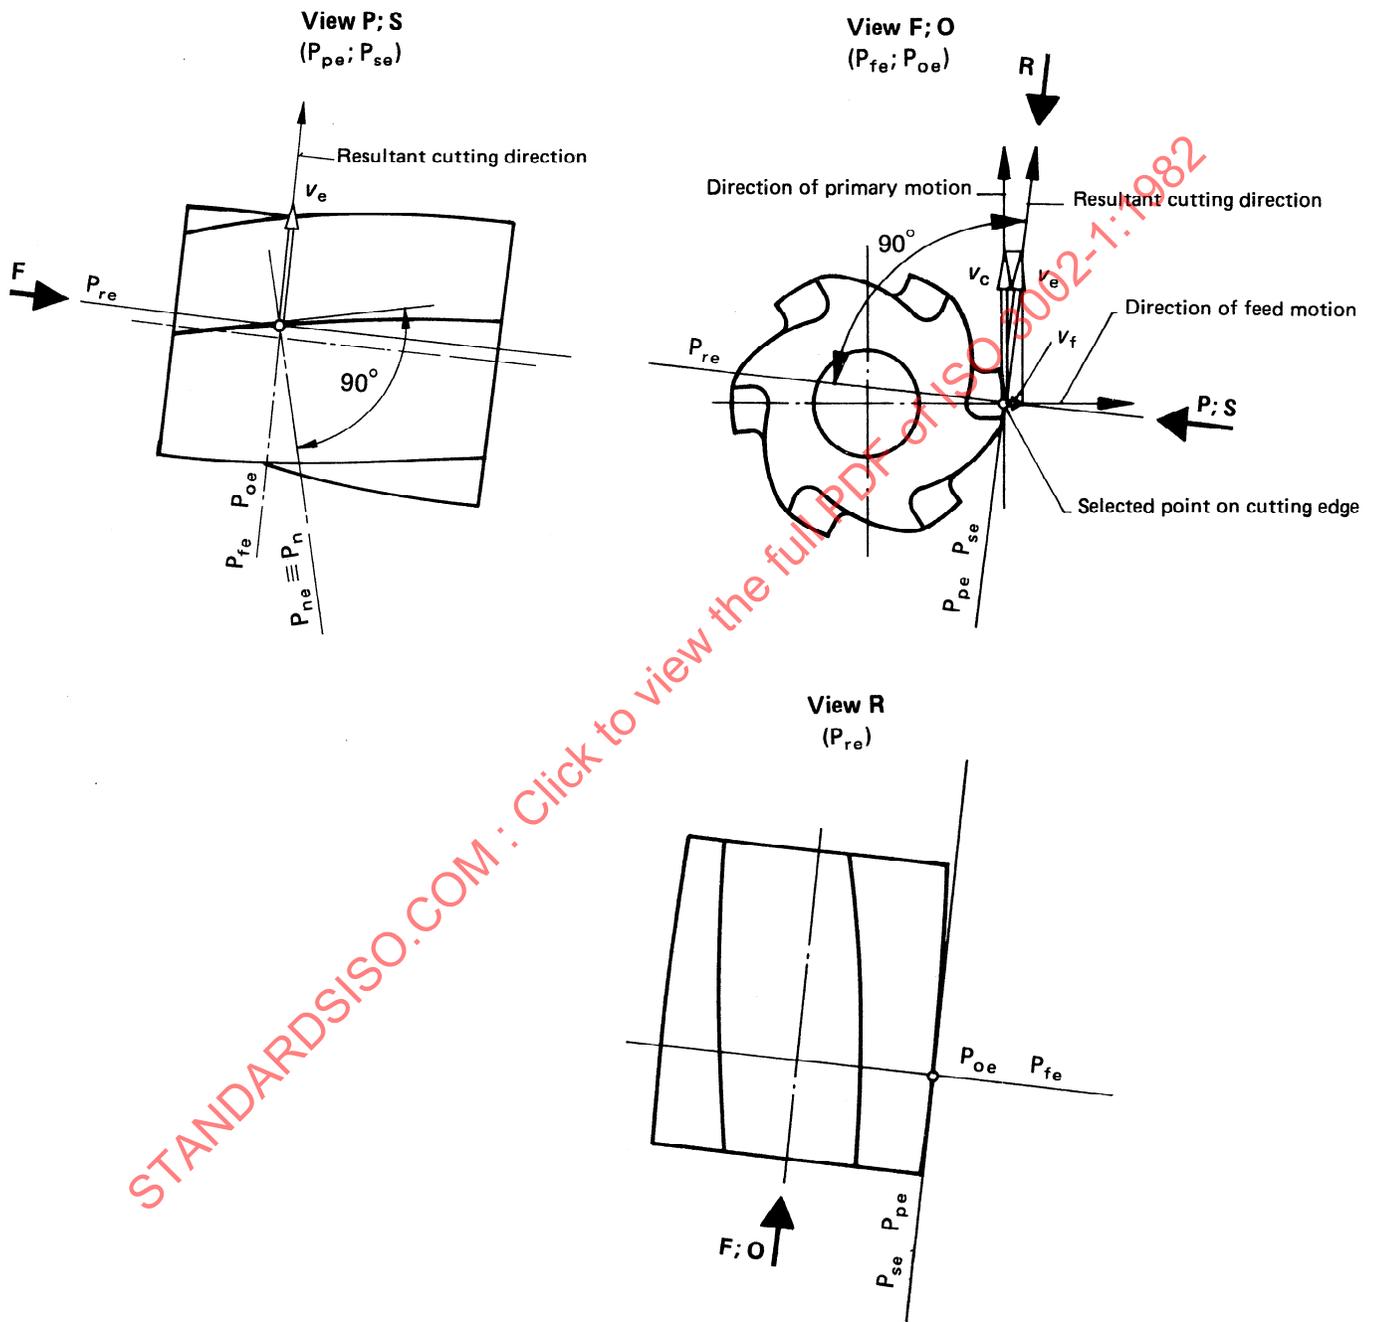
Planes in the tool-in-use system — Slab milling cutter
